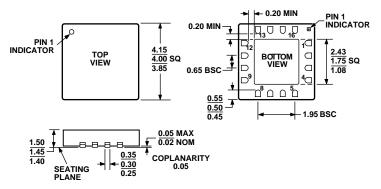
16-Lead Lead Frame Chip Scale Package [LFCSP] 4 mm × 4 mm Body (CP-16-5) Dimensions shown in millimeters
